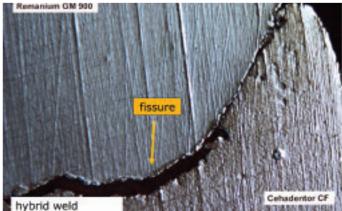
Microscopic view of the joint zone of a "hybrid weld."
